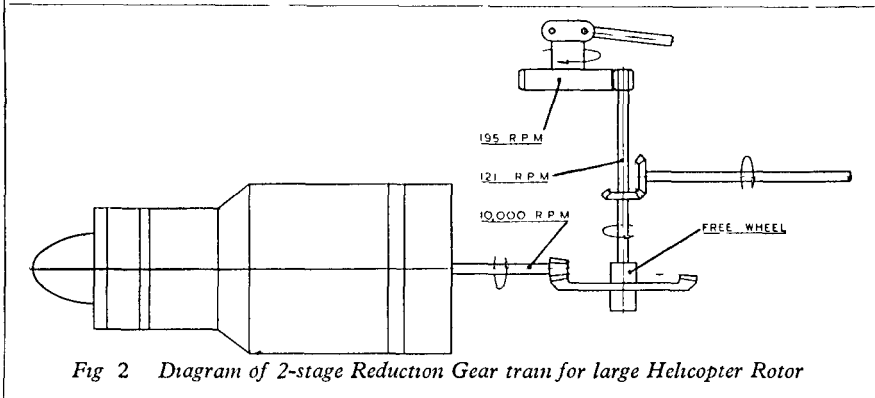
Diagram of 2-stage Reduction Gear train for large Helicopter Rotor
